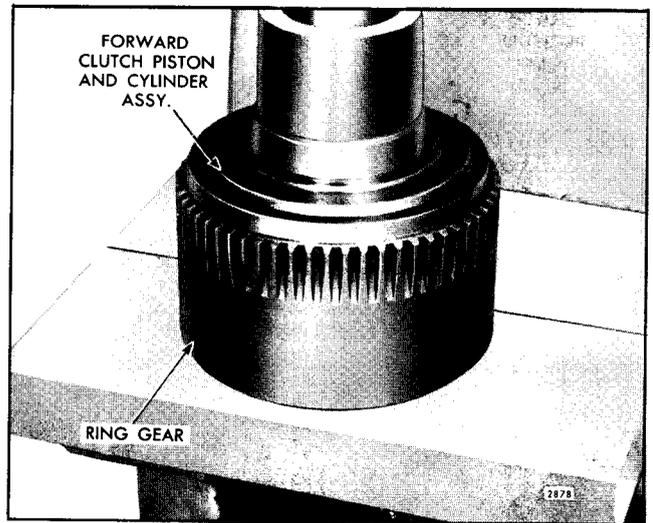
Installing Forward Clutch Piston and Cylinder Assembly in Ring Gear
